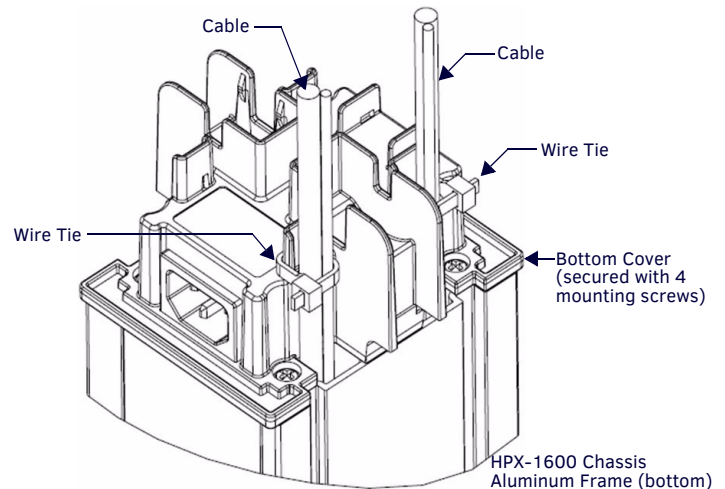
BOTTOM COVER - INSTALLED WITH CABLES EXITING AND SECURED
